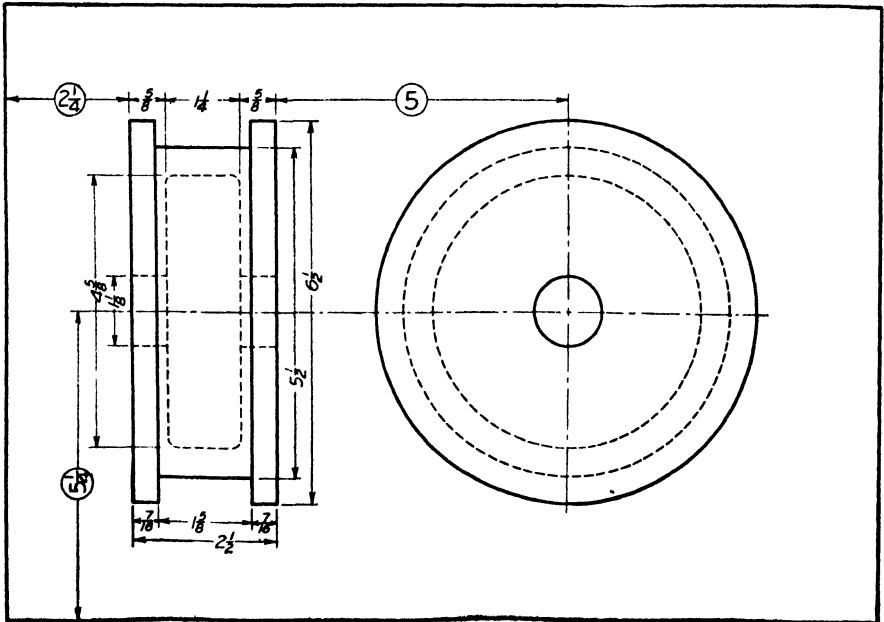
Prob. 144. Make a two-view drawing of the *steam piston*, the left-hand view to be a full section.
